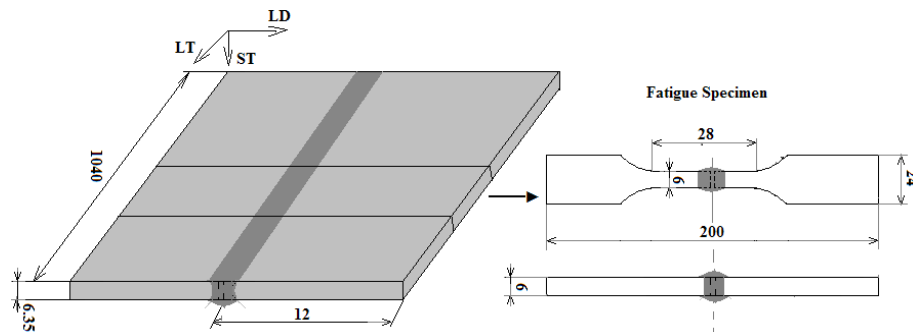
Fatigue Specimen preparation from the 6061-T651 welded plates
